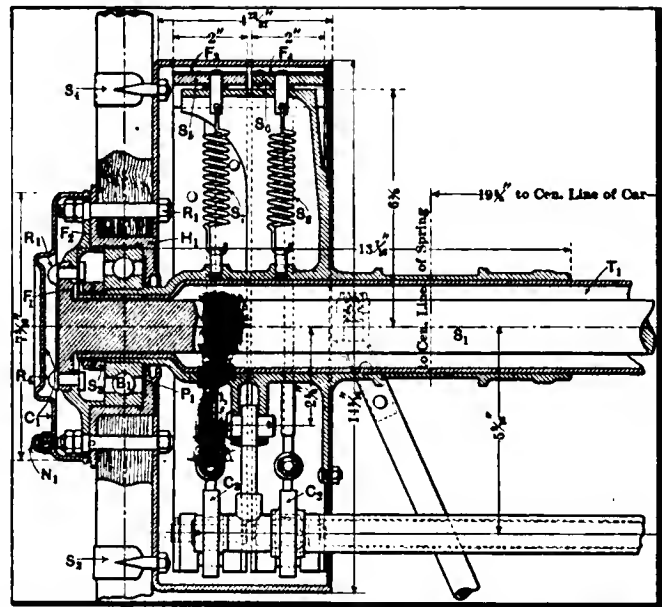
Section through rear wheel, depicting a single annular ball bearing in the center line of the spokes to take the load, and means for locking at every point
